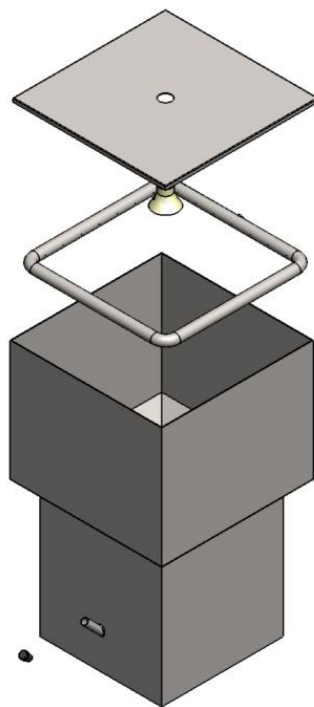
Housing and Assembly of TiO₂ Testing Apparatus
